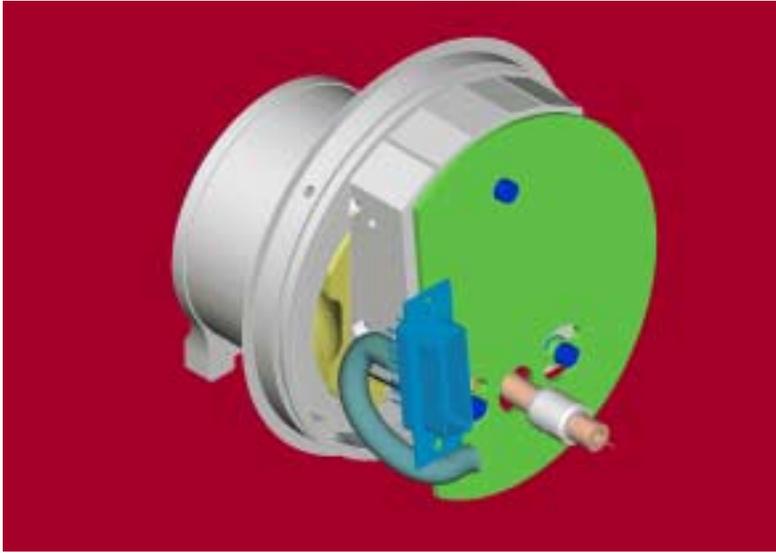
Drawing of the integrated sensor-head with removed cap. The electrical connector J4 (blue) and the mounting pins (blue) of the PCB (green) are visible. Quartz housing and cooling finger are made from aluminum (silver). A small part of the quartz body is also visible (gold-yellow). The optical fiber (pink) pierces the PCB.
